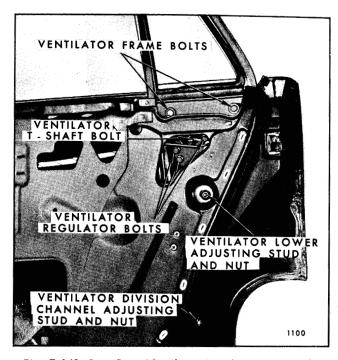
Rear Door Ventilator Attachments - 68069-68169 Styles
